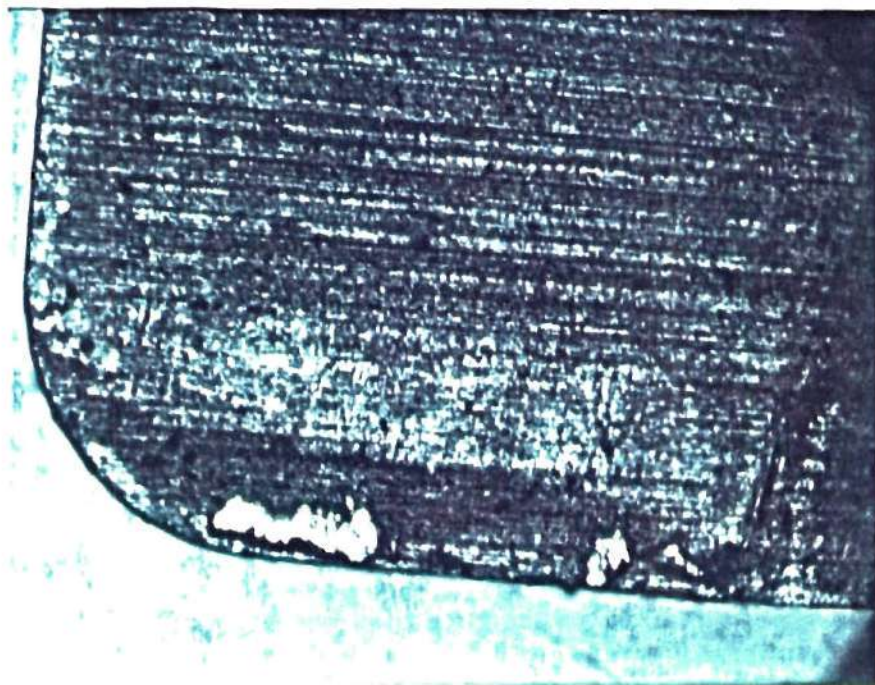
Coated Tungsten Carbide Tool, S4, Machined for 4 Minutes, 13 Seconds at a Surface Speed of 106.7 Meters per Minute
